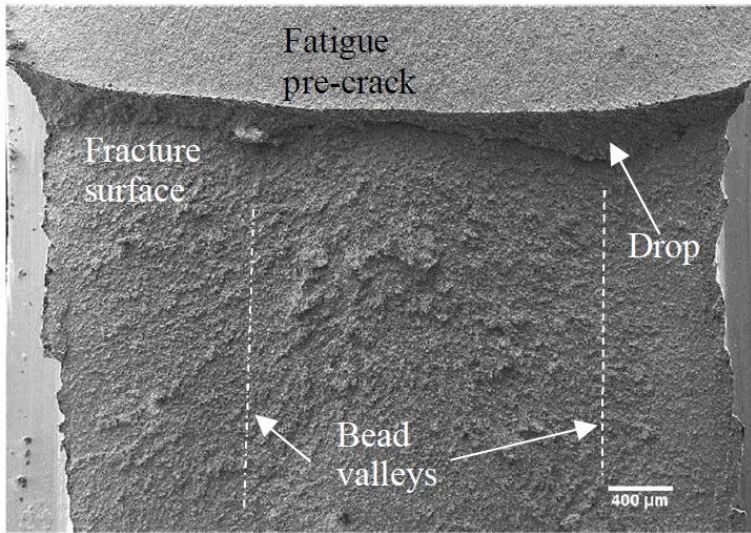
Fracture surface of a high fracture toughness specimen.
